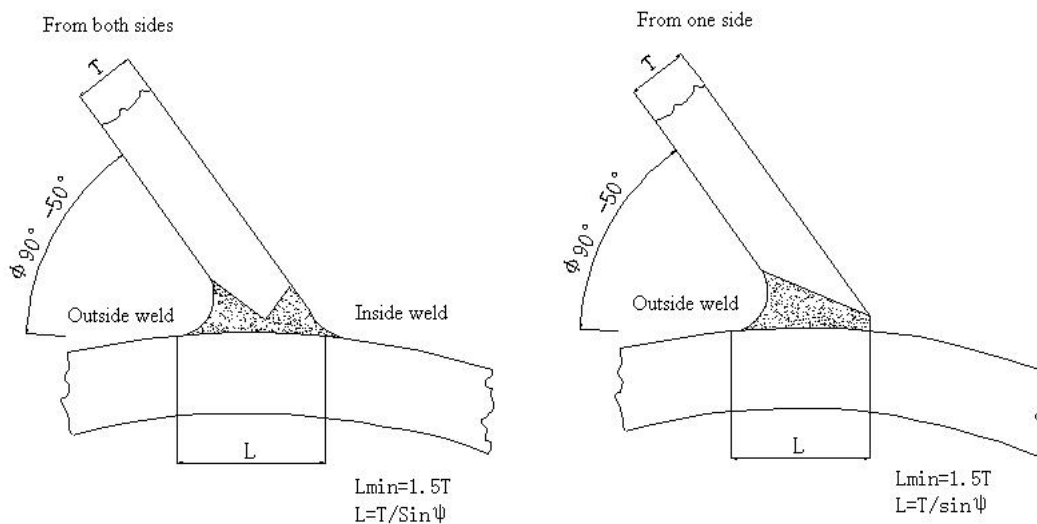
(4) Weld Location 3
